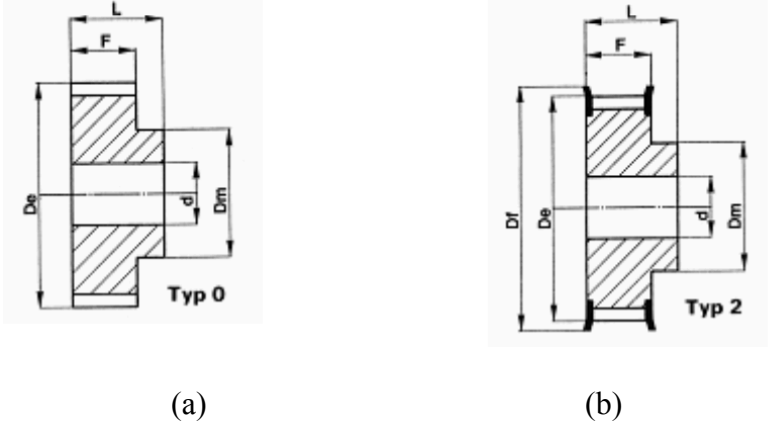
Pulleys (a) without flange (b) with flange [44]
